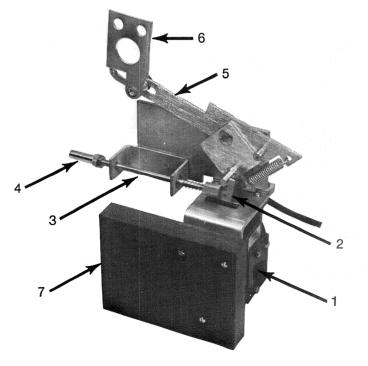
Side view of front frame showing mounting of flux shift trip device.
